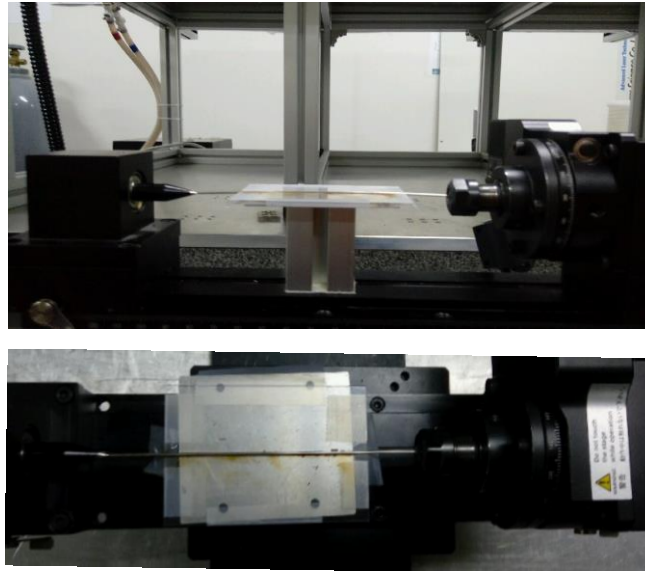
a) The picosecond UV laser machining system to manufacture the patterned tubes, b) the glass jig installation for precise alignment during the manufacturing process of the tubes with diameters of 1 *mm* or less
